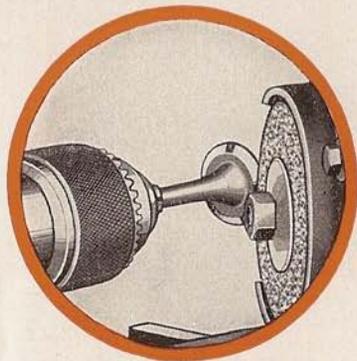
Close-up of Grinding Valve Face in the Precision Valve Chuck.
